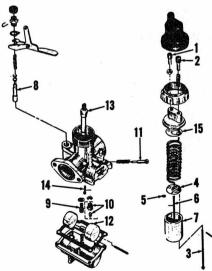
Exploded view of typical sliding valve carburetor used on all models.
